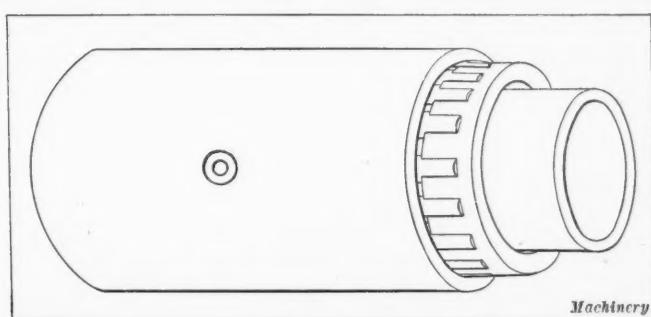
Roller Journal Bearing provided with Both Inner and Outer Races
